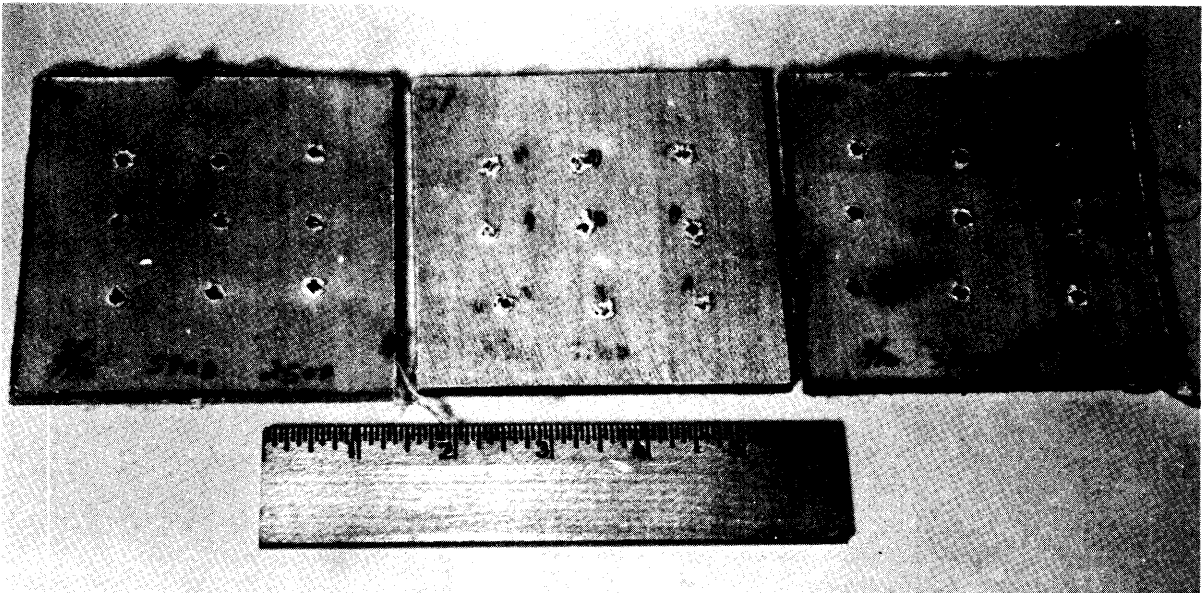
DRILL: .190 SPADE DRILL
